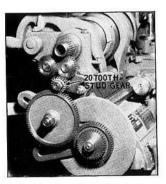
Model A Lathe set up for cutting threads 8 to 224 per inch
